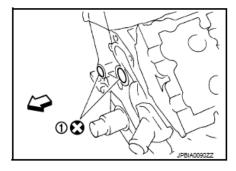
Identifying Cylinder Block O-Rings Courtesy of NISSAN NORTH AMERICA, INC.
